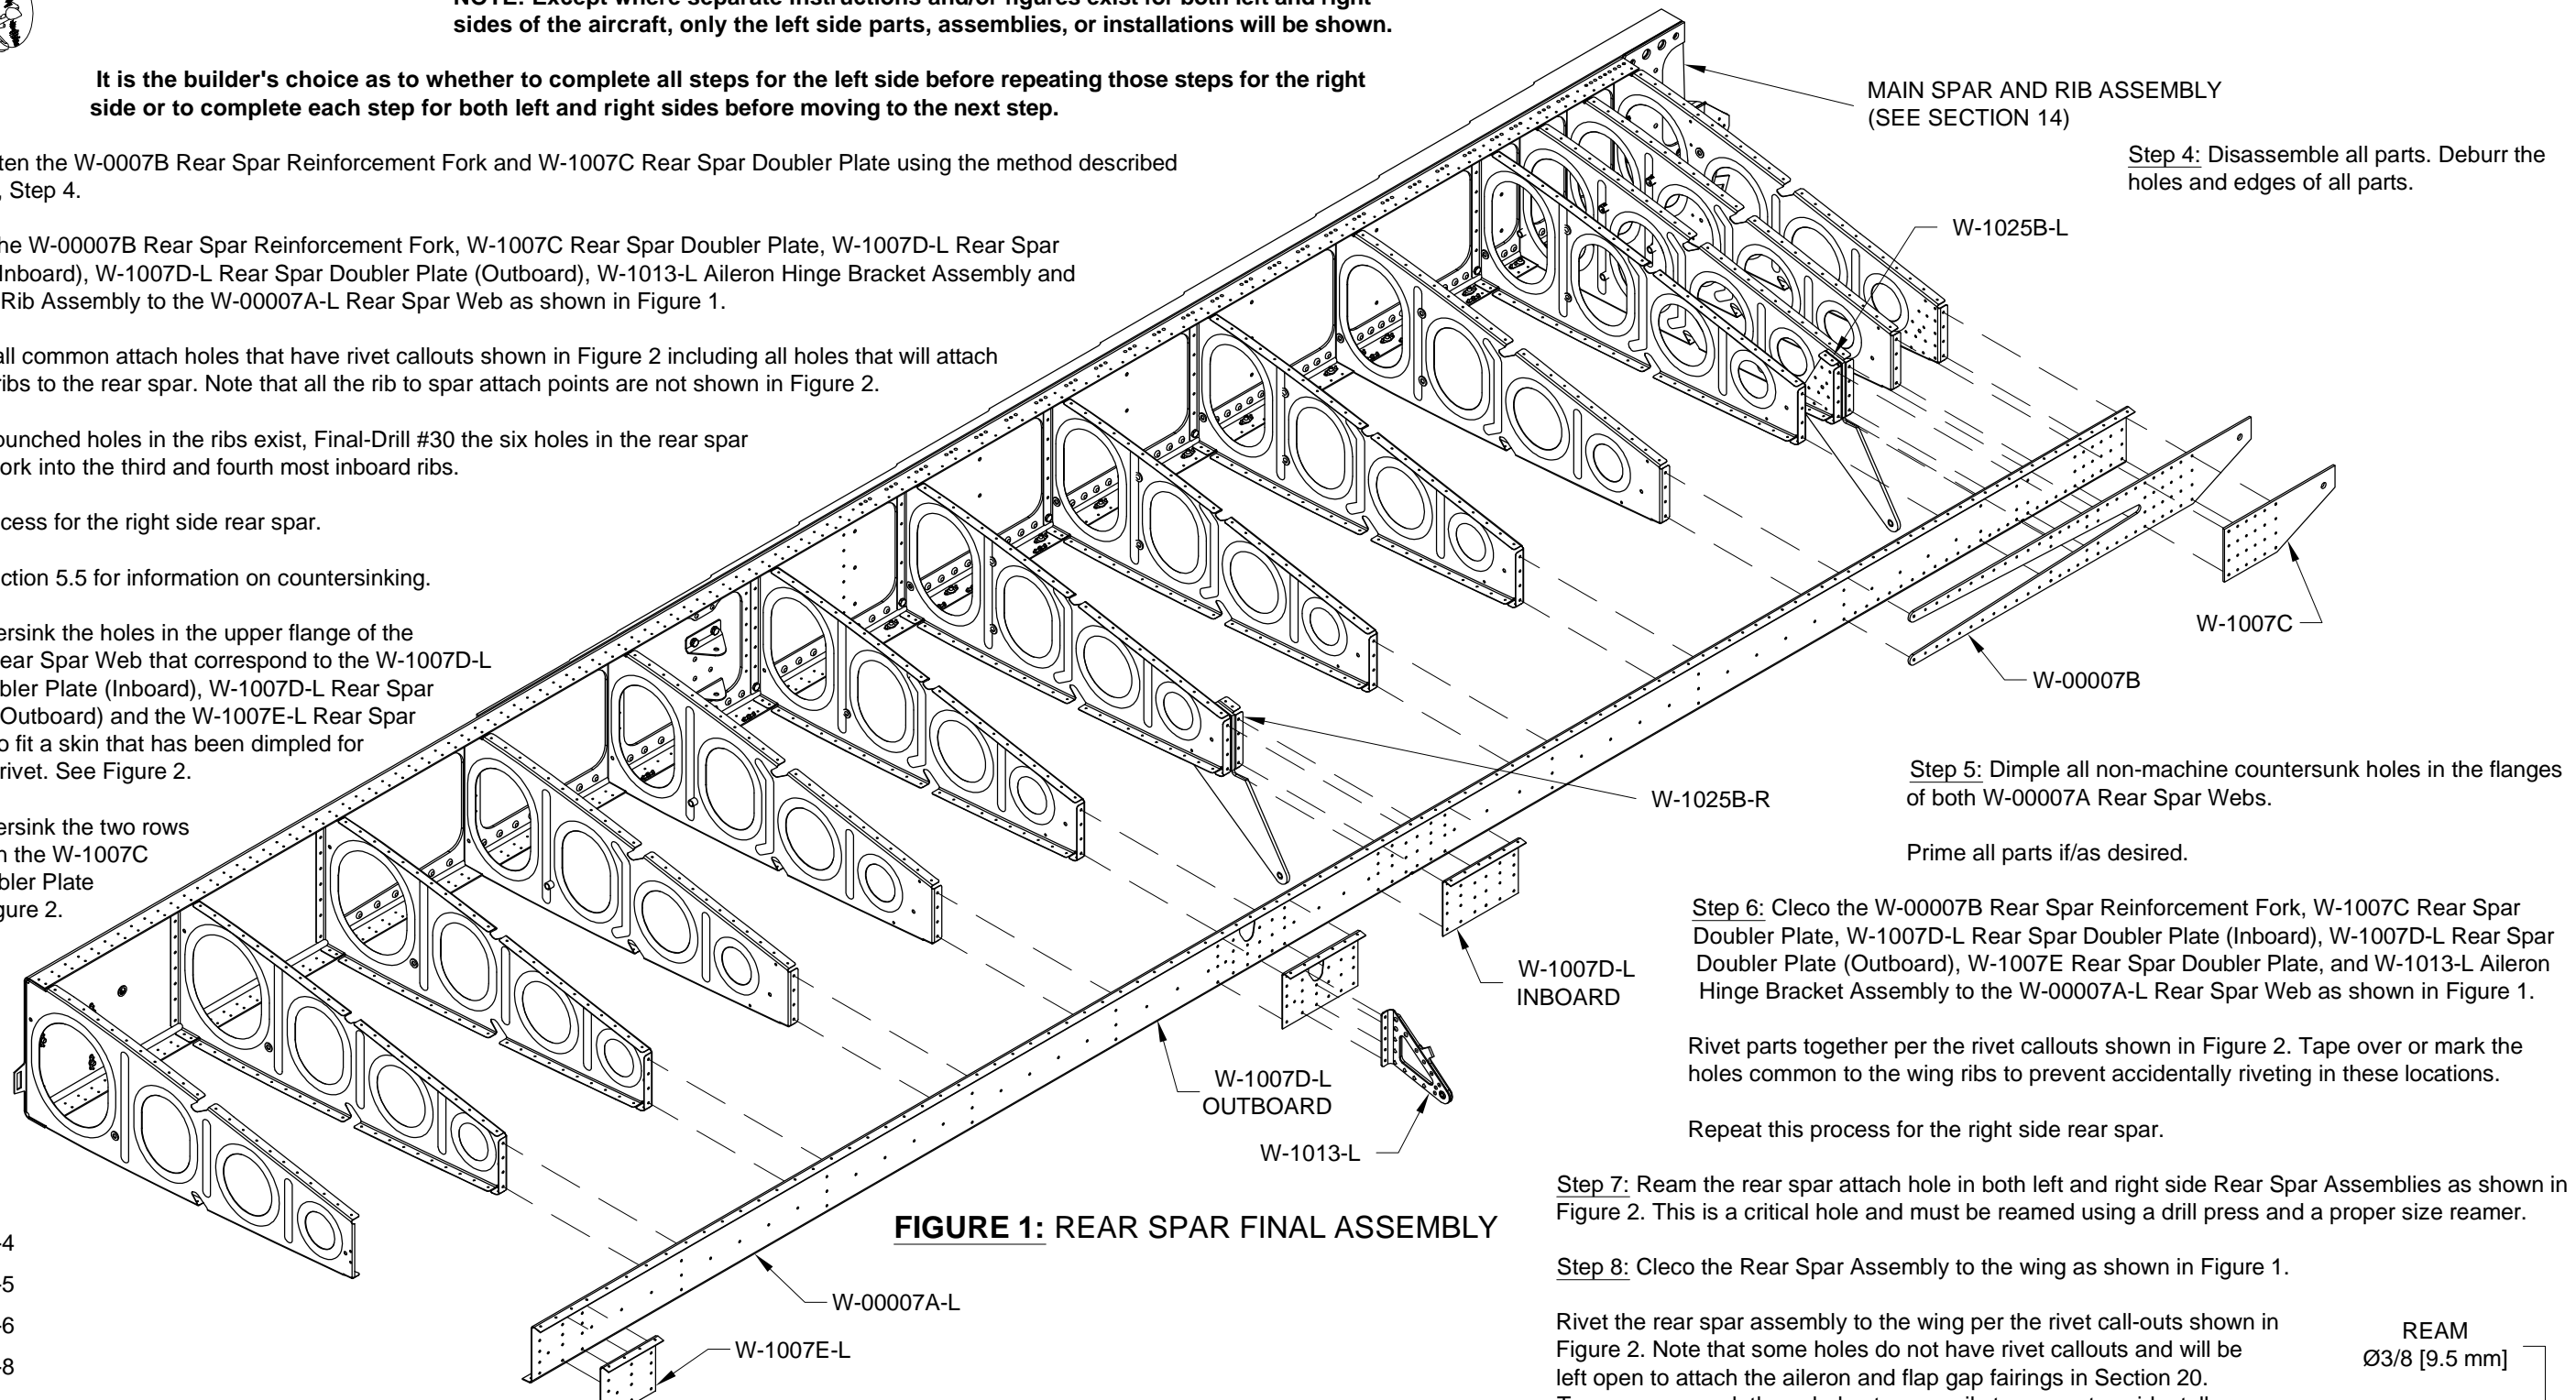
REAR SPAR FINAL ASSEMBLY
